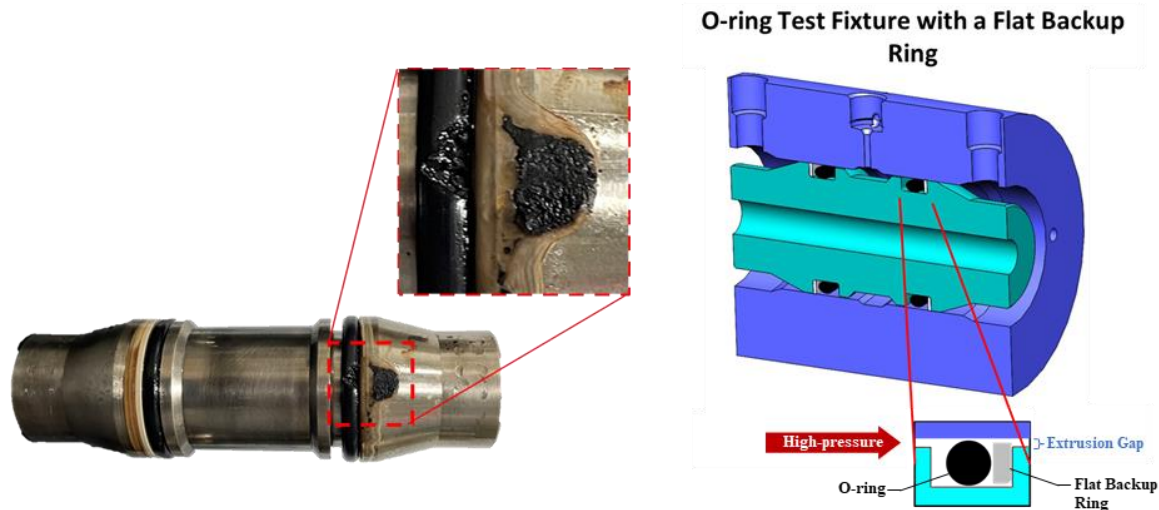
Sealing assembly image and diagram. Diagram depicts the cross section of an O-ring test fixture with a flat backup ring. Left image illustrates failure of a primary seal and flat backup ring after a test following an extrusion-to-failure test protocol. Damage to the primary seal is visible as is residue from the primary seal located on the damaged flat backup ring. Material from both the flat backup ring and the primary seal have been deposited or deformed into the extrusion gap located between the mandrel and test fixture.
